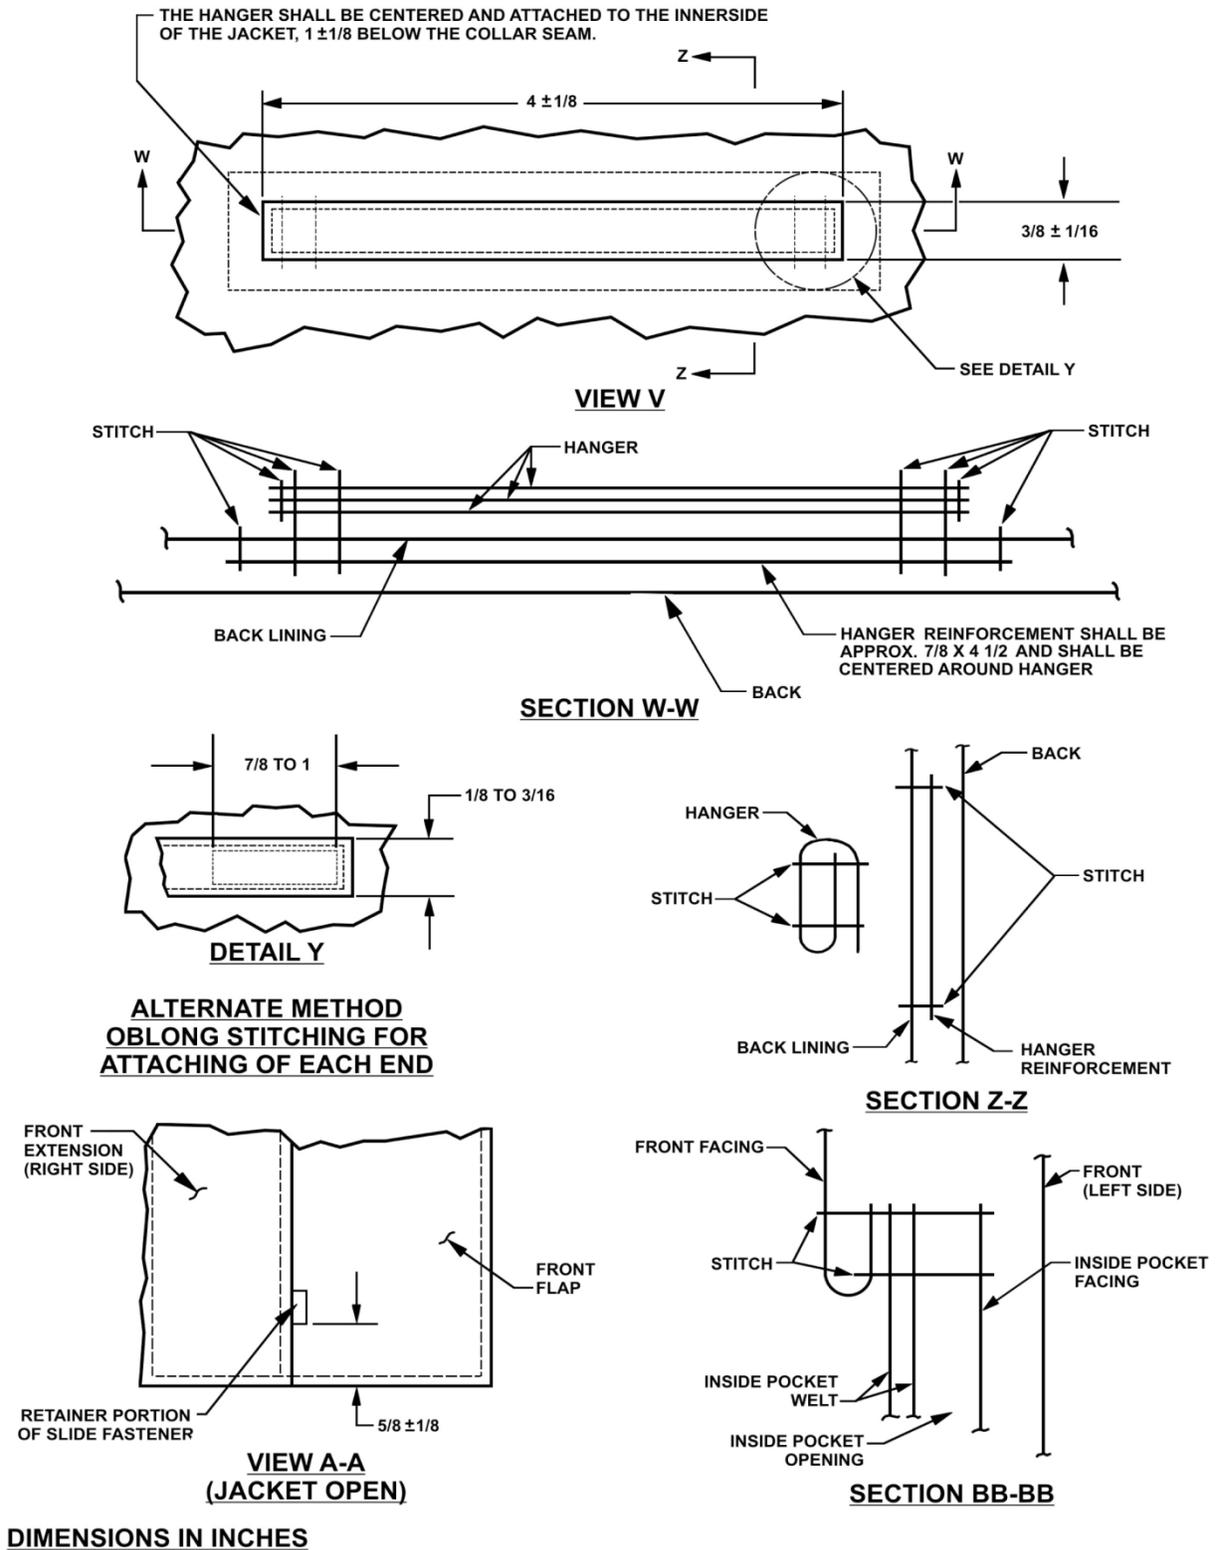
Hanger and jacket sections and view locating retainer portion of the slide fastener.
